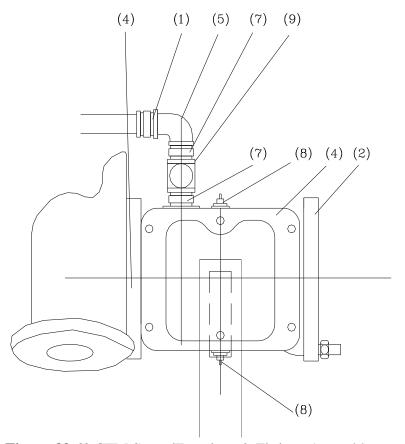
60 CFM Sump/Tee piece & Fittings Assembly
